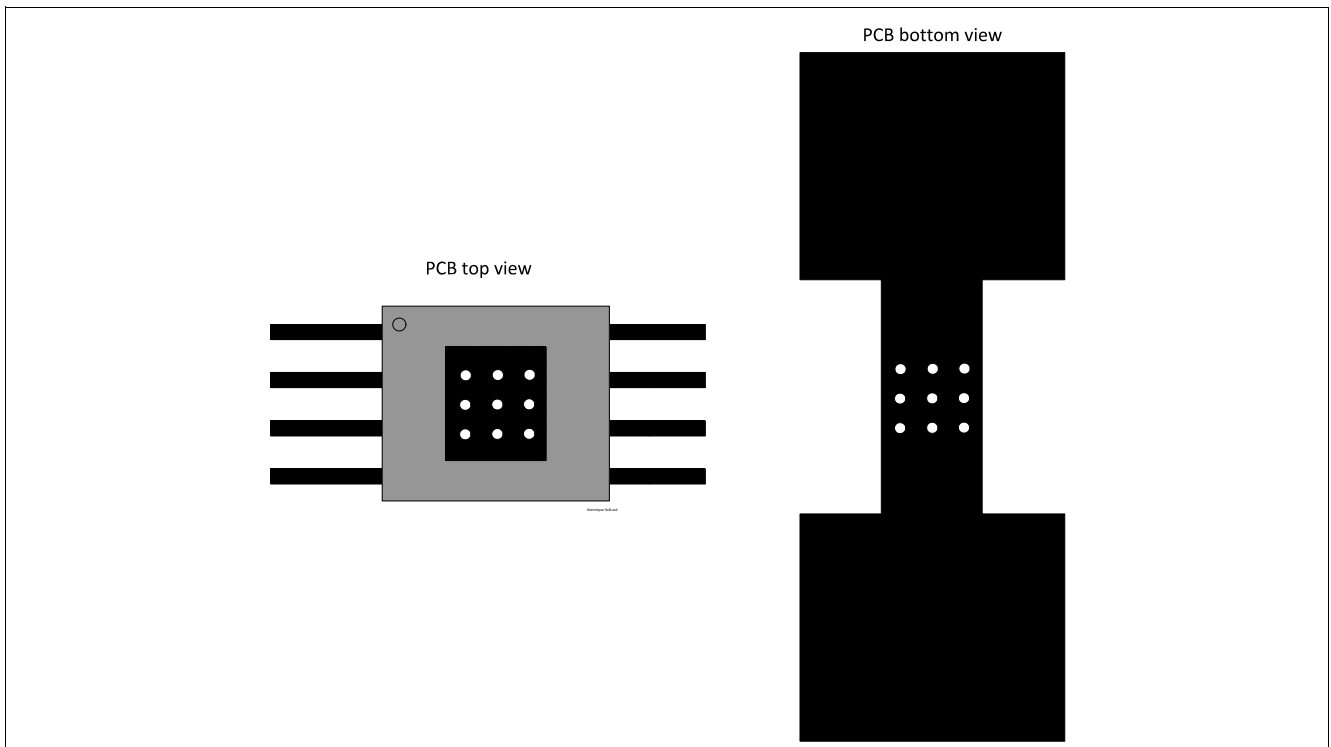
PC Board Top and Bottom View for Thermal Simulation with 600 mm² Cooling Area
